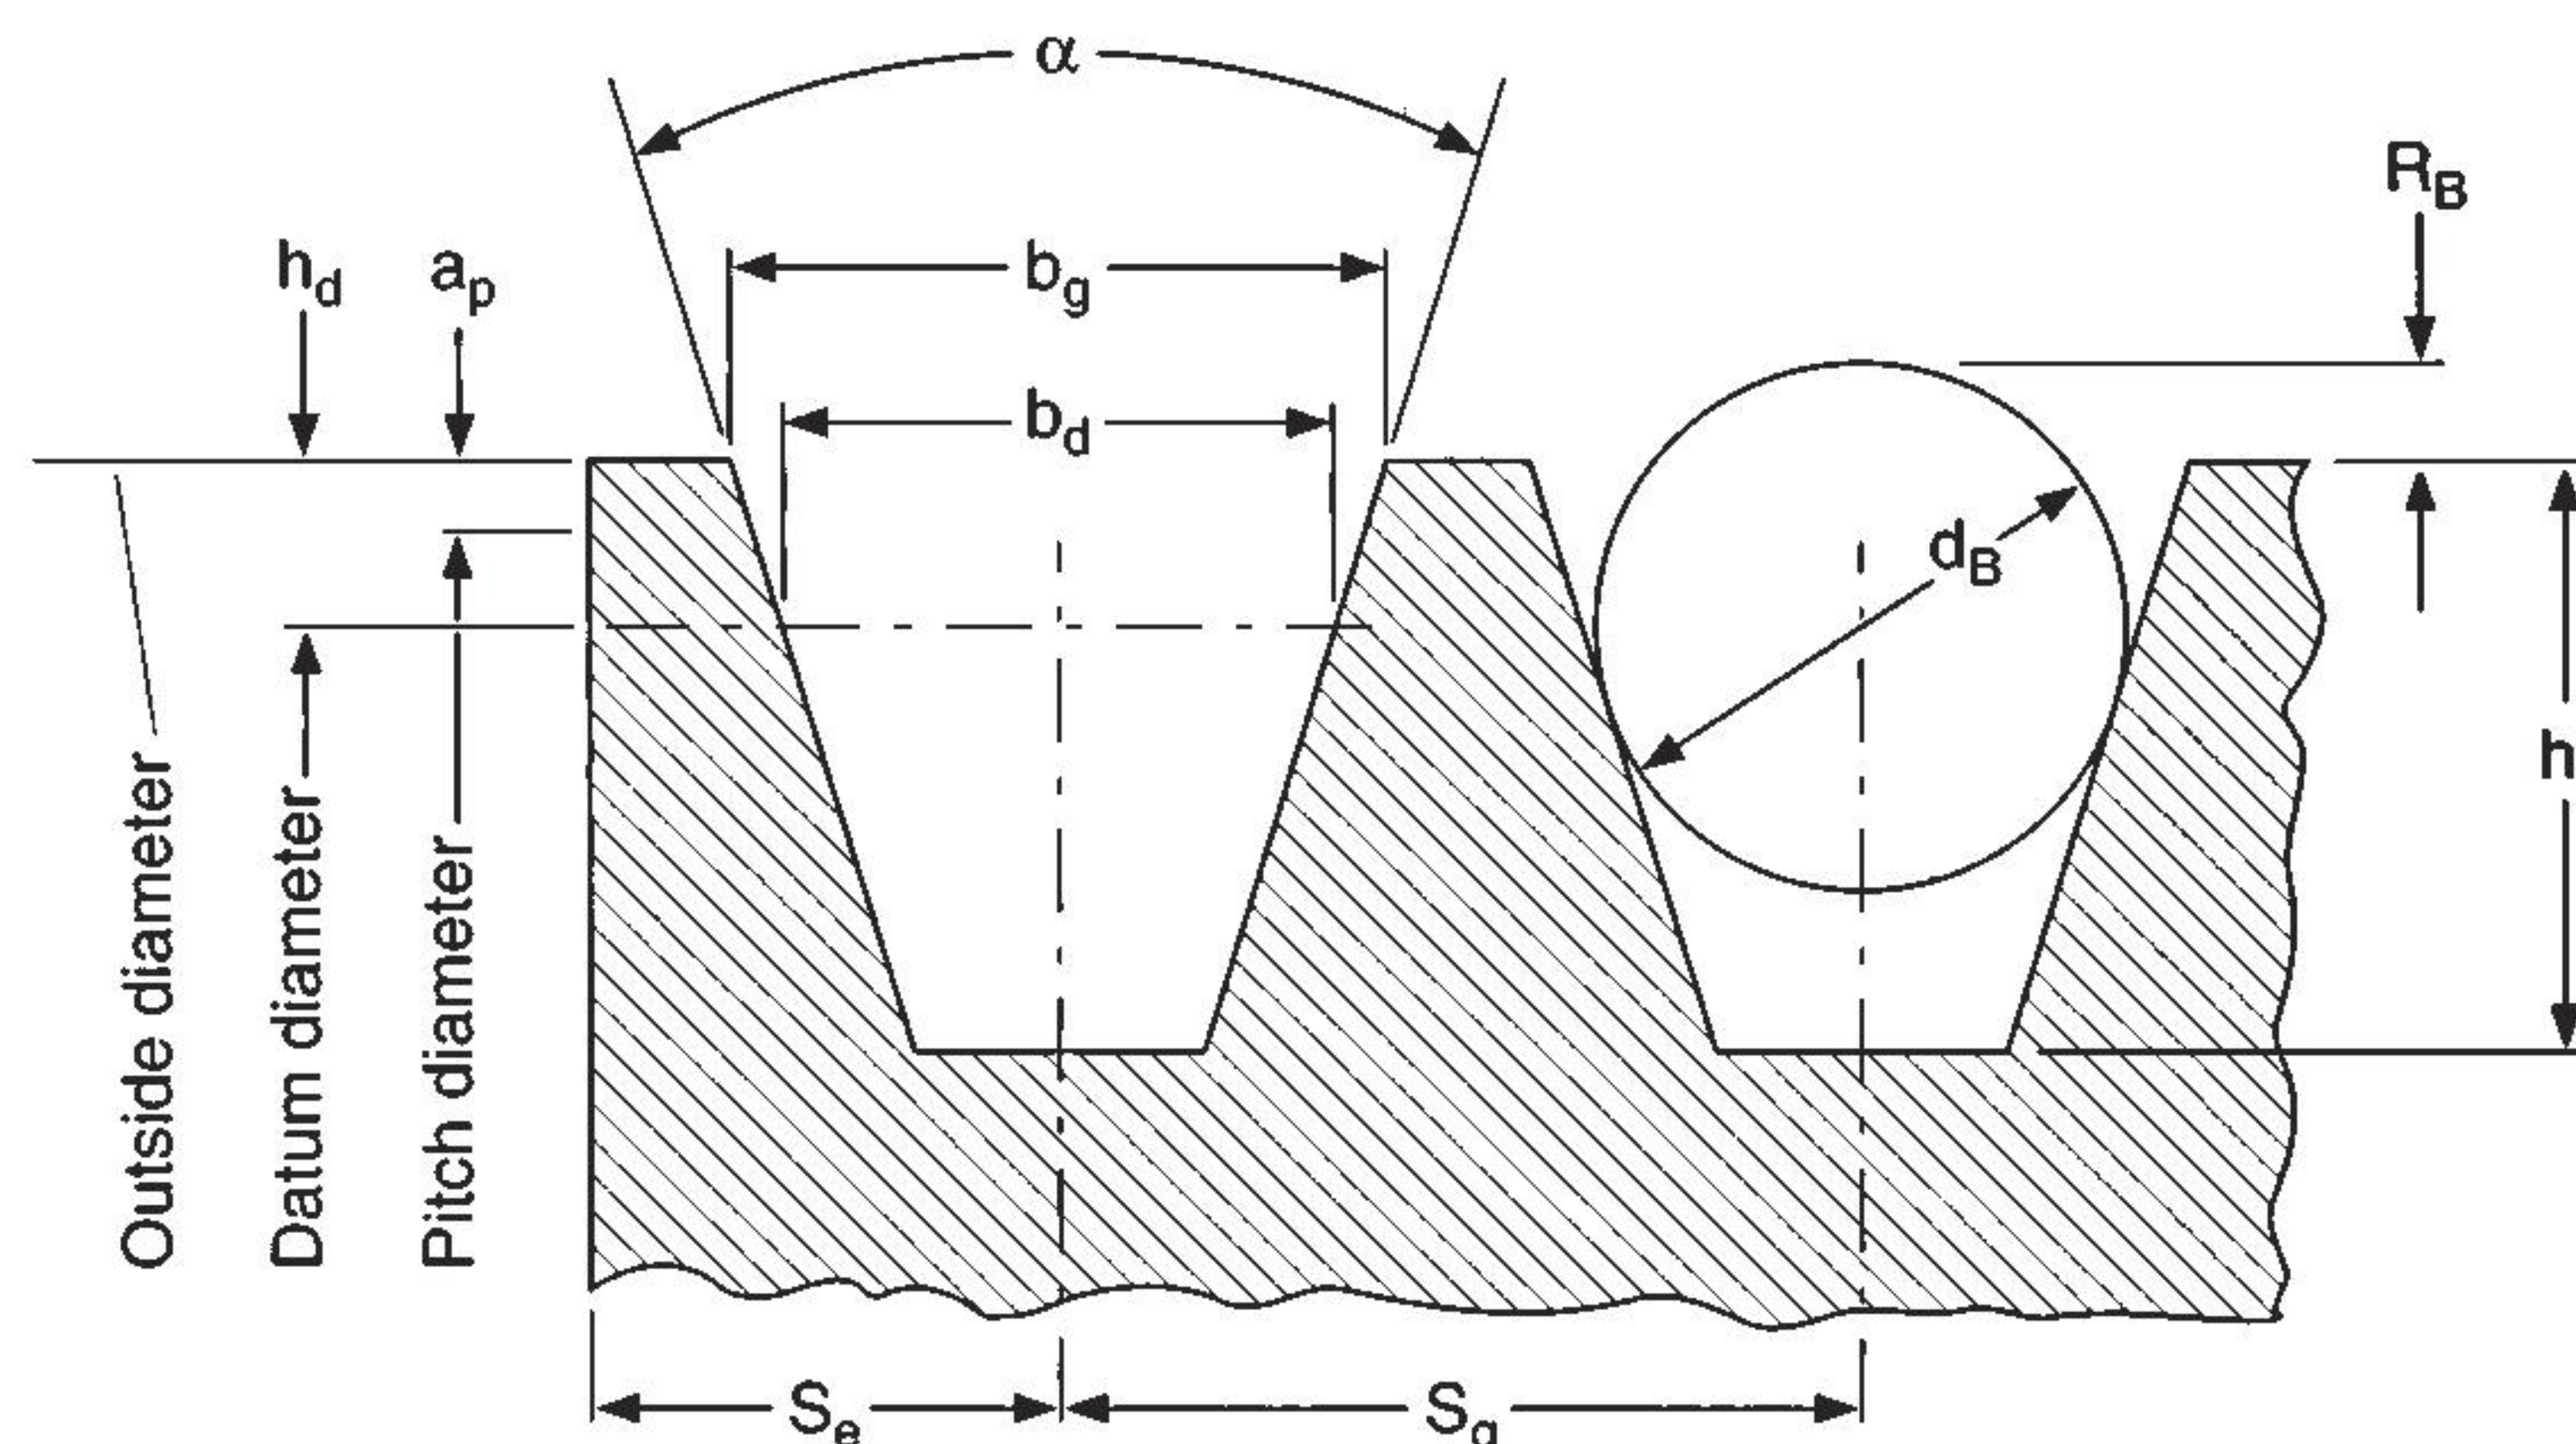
Groove dimensions for standard industrial V-belt sheaves.
